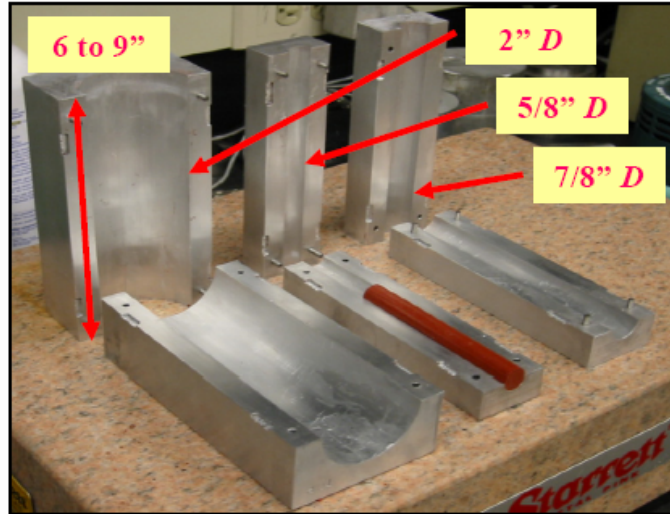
Aluminum split-molds used for manufacturing epoxy-cast specimens with different cylindrical geometries used throughout this study are shown.
